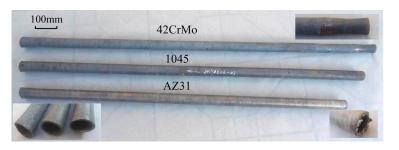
Finished seamless steel pipe prepared by tandem skew rolling [36] (Reprinted from ref. [36]).
